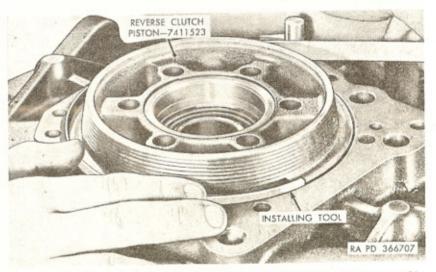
Using tool—A7950335 to install reverse clutch piston assembly.
